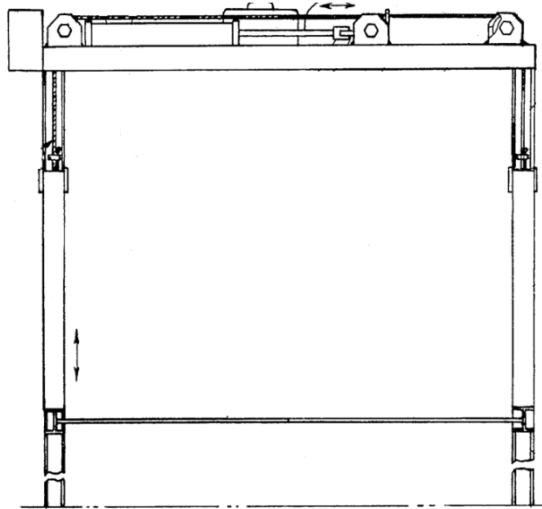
Plan view of cantilevered boat hoist showing actuator location.
